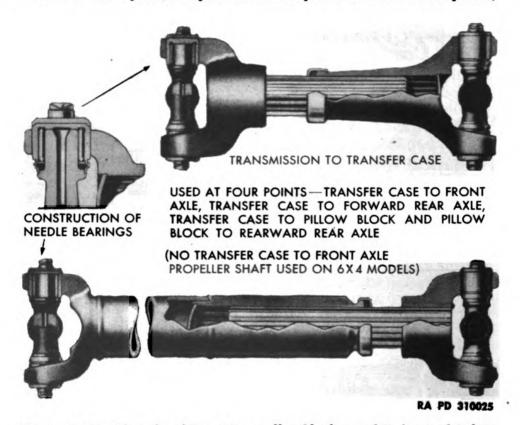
Cleveland Type Propeller Shafts and Universal Joints
